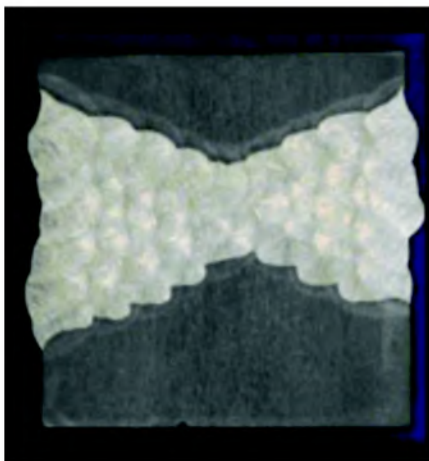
A 2-in.-thick weld made by T-GMAW in the horizontal (2G) position.
